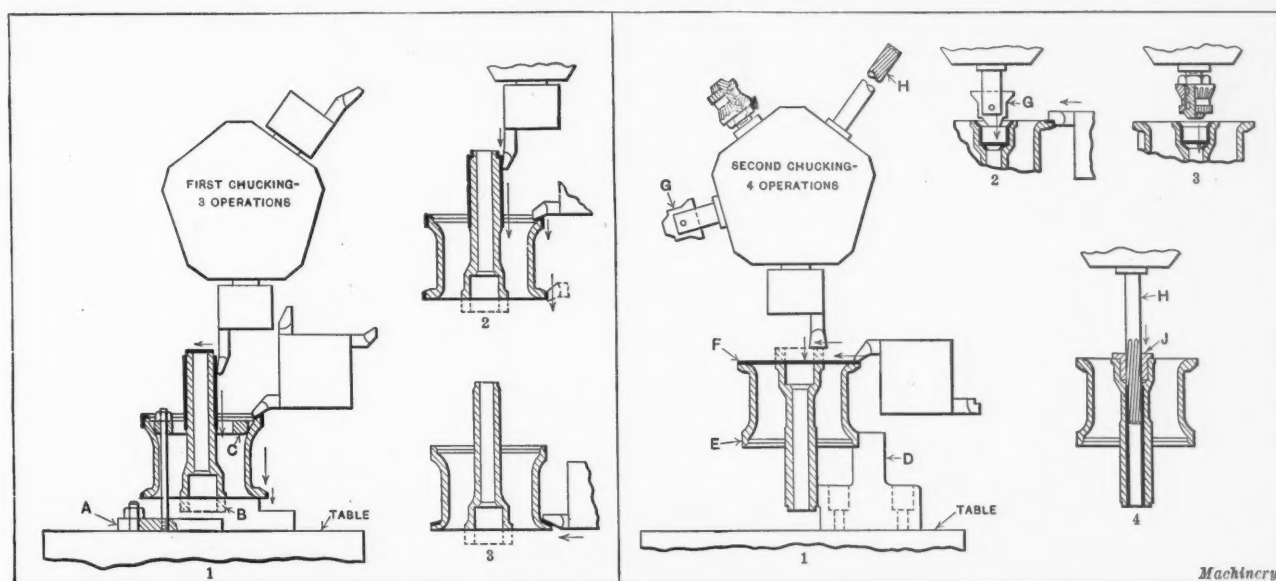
Tooling Lay-out of the Two Chuckings required to machine a Main Throttle Valve for a Locomotive
